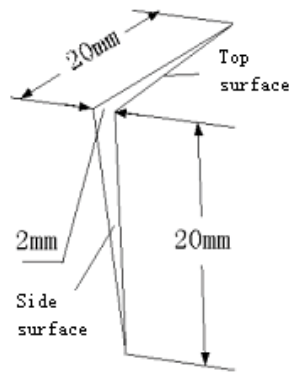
Dimensions of one kinds of crack with “V”-shape
